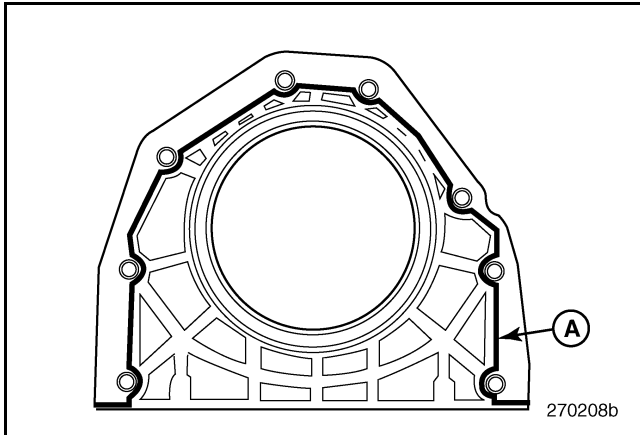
Sealant Application Pattern — Crankshaft Front Seal Cover to Block
